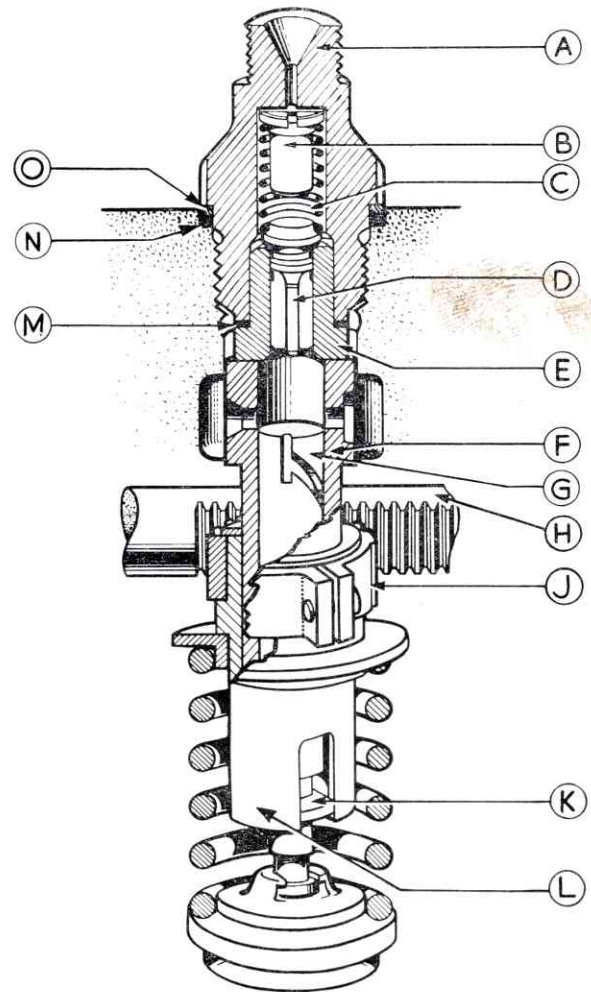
THE PUMPING ELEMENT ASSEMBLY
